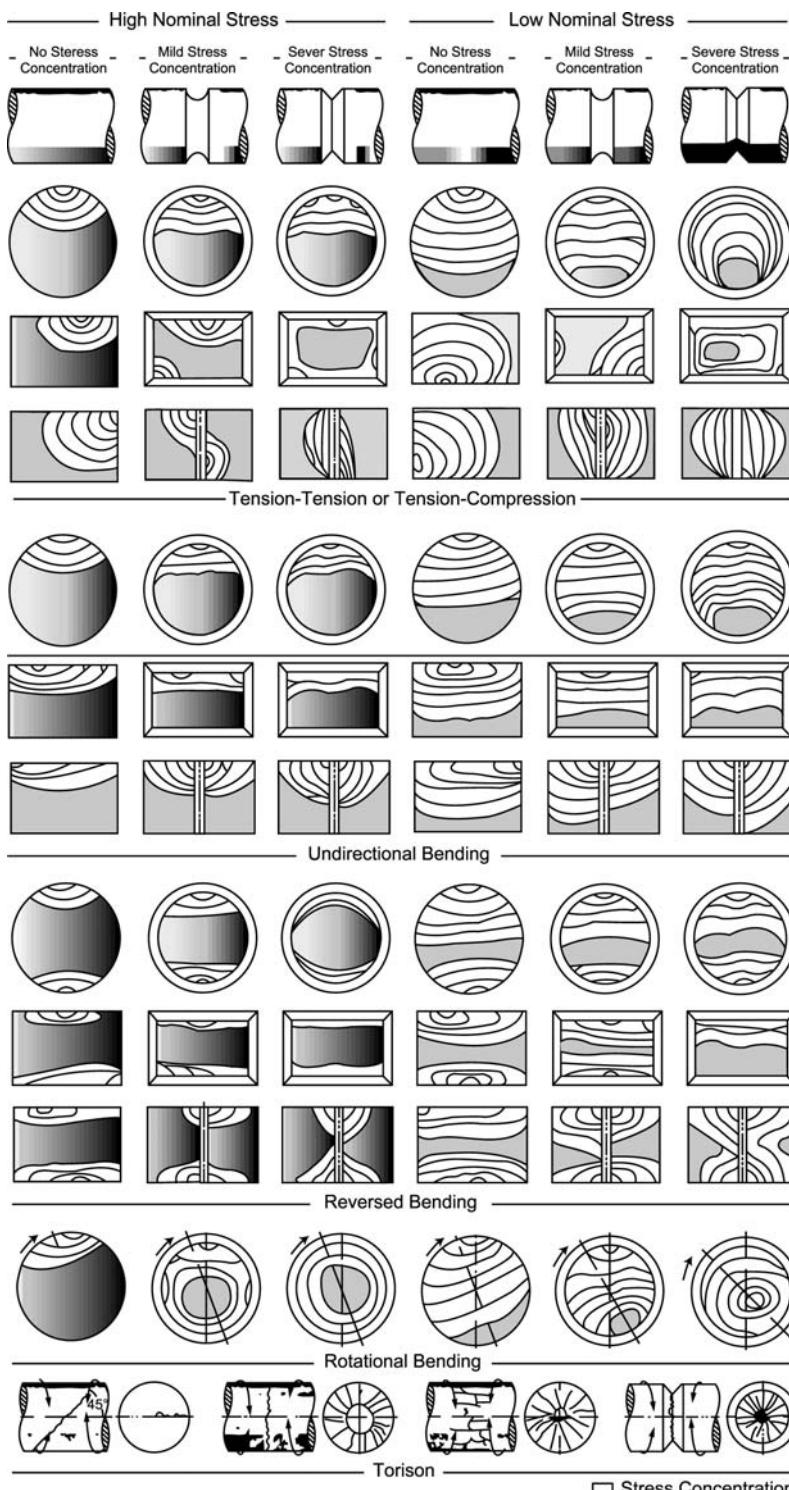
A Typical fracture surfaces for laboratory test specimens subjected to a range of different loading conditions.
